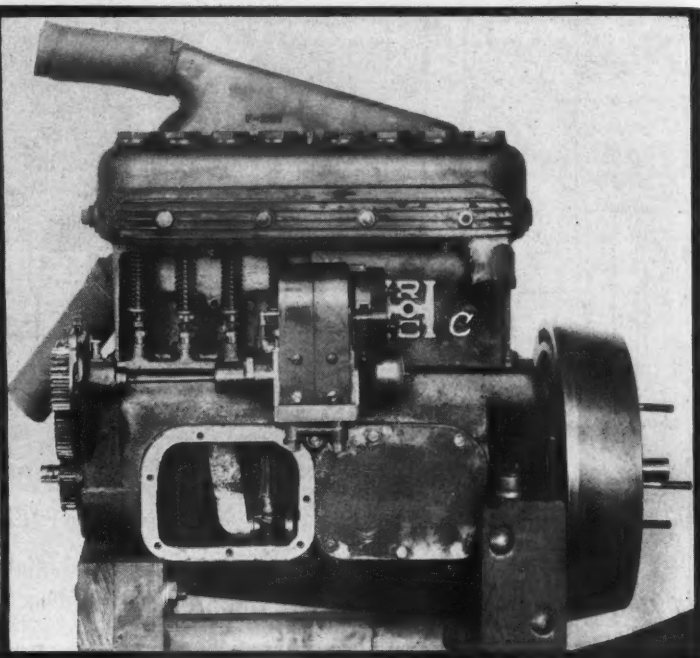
LEFT SIDE OF R. C. H. MOTOR SHOWING PLATE C COVERING VALVE LIFTERS AND CRANKCASE COVER PLATES
